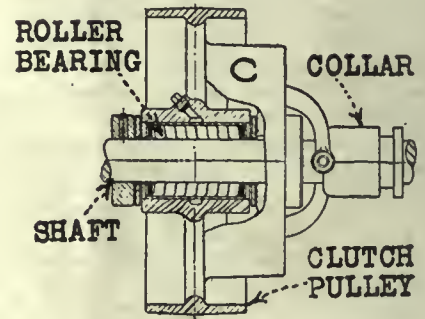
ROLLER BEARING IN HANGER SHOWING COMPLETE CONSTRUCTION.
